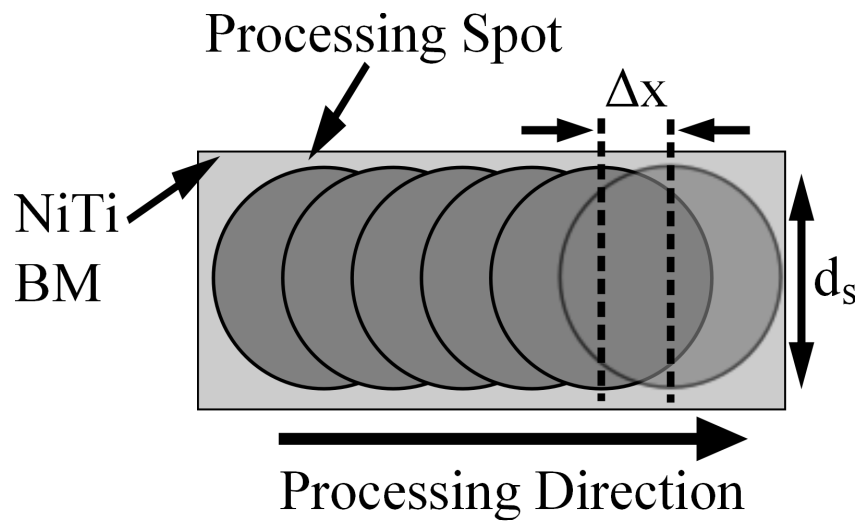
Pulsed laser processing of a NiTi strip using OL. The d_s parameter is used to determine the movement of the laser head (NiTi strip) or angular rotation of the auto-feed spindle (NiTi wire) to achieve the desired OL.
